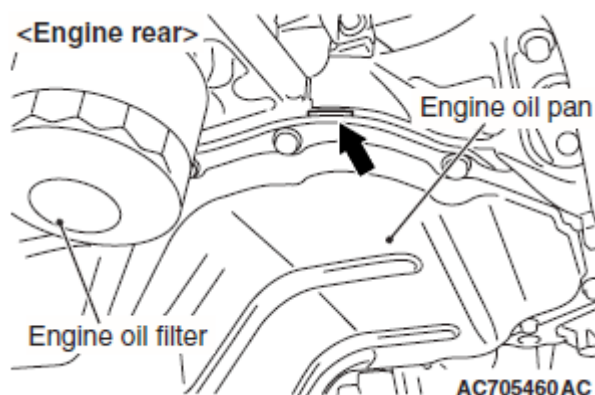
Identifying Engine Oil Pan And Engine Oil Filter
